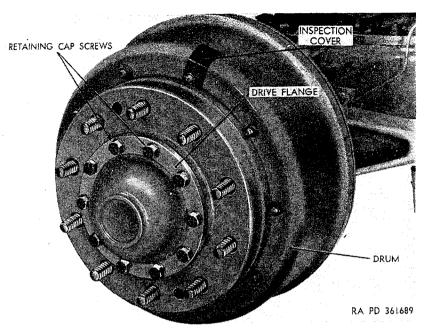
Hub and drum assembly with wheel and tire assembly removed.
